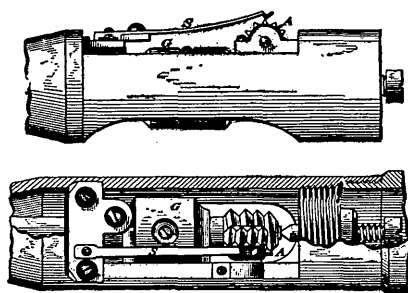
Details of mechanism of current meter, Moulinet, type H. A is pin on vulcanite wheel; G, counterweight on revolving shaft; S, spring closing contact with pin A.
